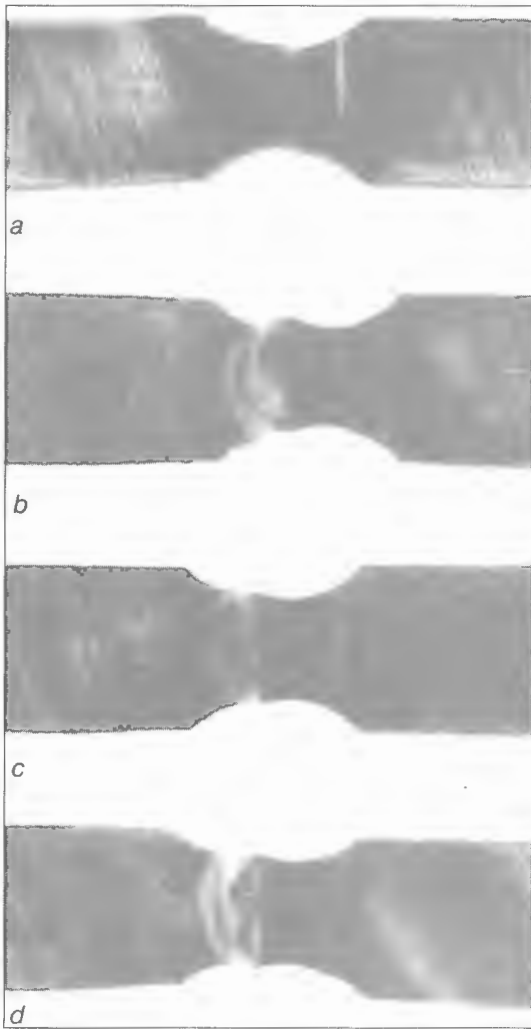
Welded samples after tensile testing (see designations in Figure 1)
